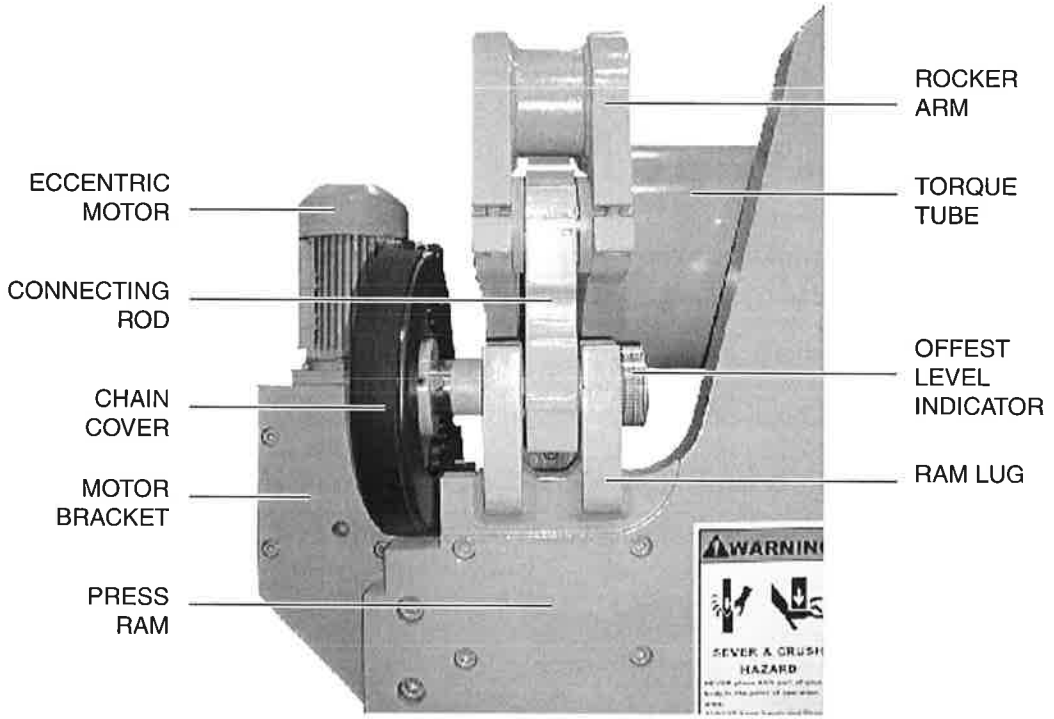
Ram Parallel Adjuster Assembly (Models 175 Ton and up)
